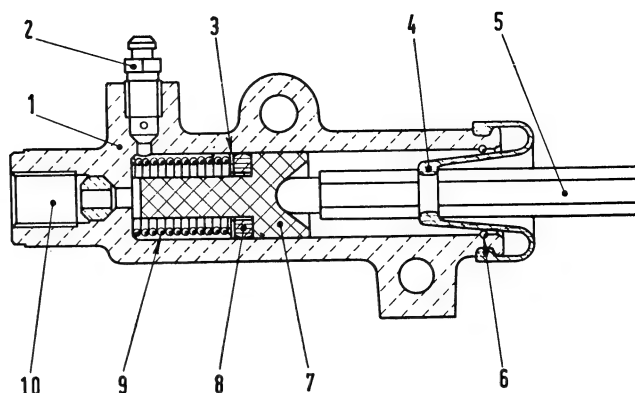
Clutch actuating cylinder (1600 S Cabriolet).
